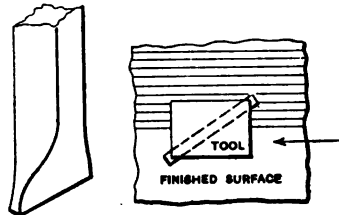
Finishing Tool of Approved Design for Planer or Shaper.
